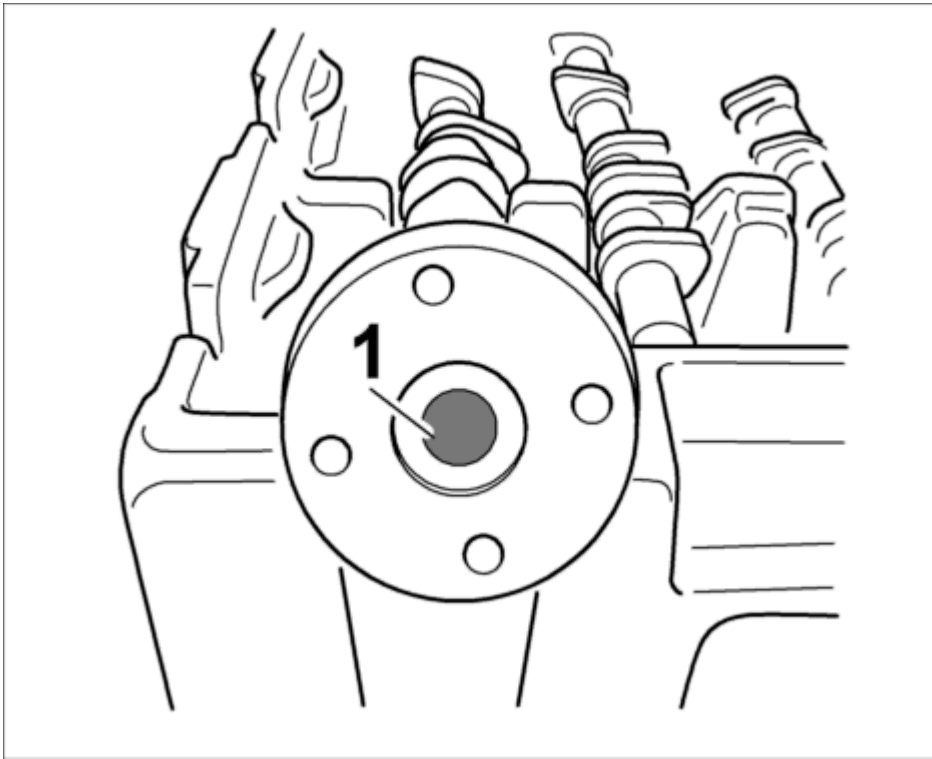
aluminum plugs in exhaust camshaft 4 - 6
